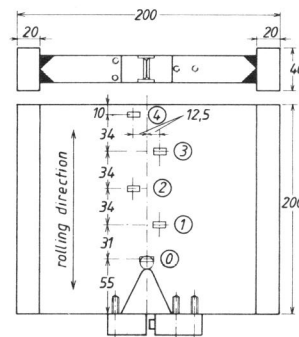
Straingauges instrumented SENT-test specimens for 12.5 and 25 mm thick Fe510 steel plate.
